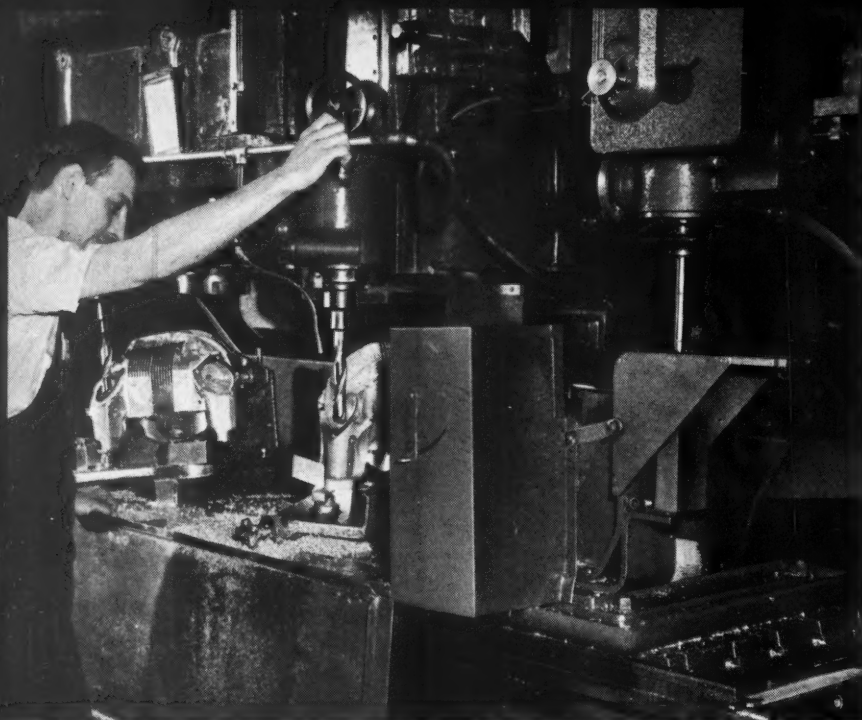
The faces and bores of intake and exhaust ports in forged aluminum cylinder heads are contour-milled in a two-spindle Hydro-Tel
